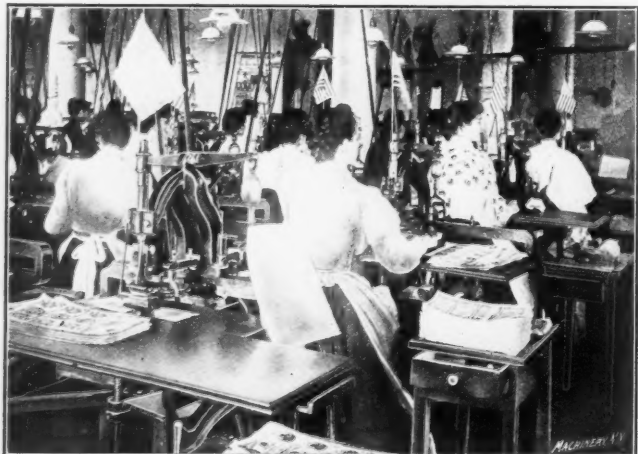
Numbering Bills at the Bureau of Engraving and Printing.
